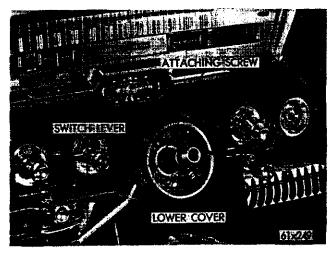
Directional Switch and Lever— Steering Wheel Removed
